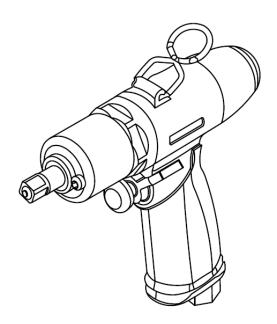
PISTOL HYDRAULIC IMPULSE TOOL
